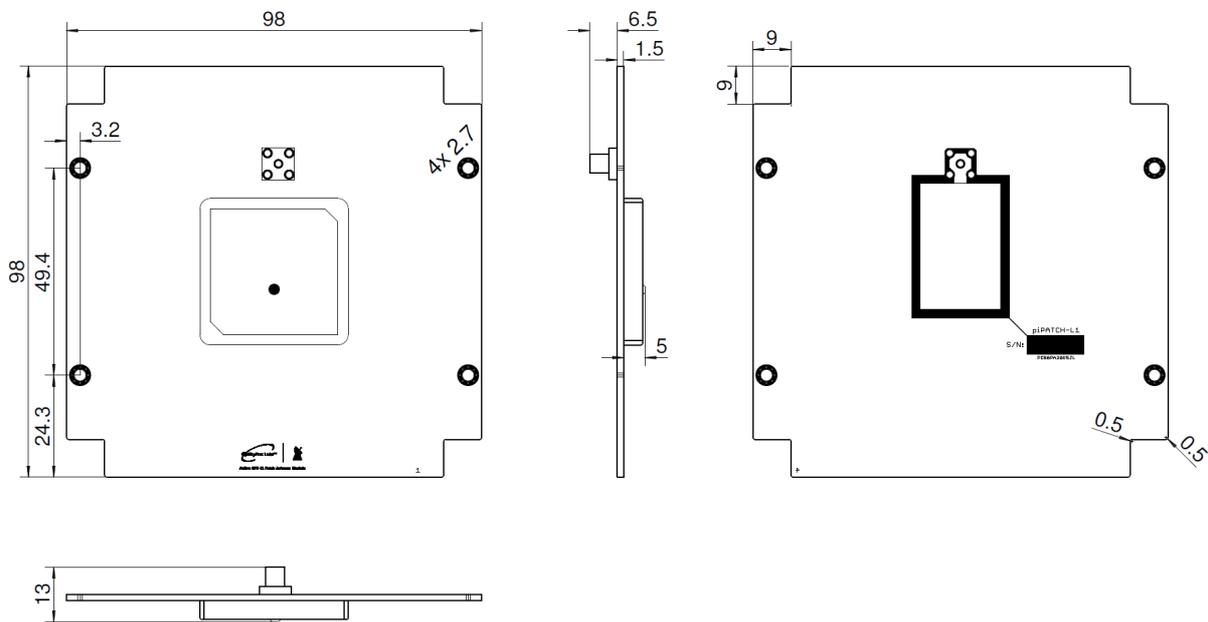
piPATCH-L1E1 Dimensions drawing, measures are in millimeters. Not to scale.
